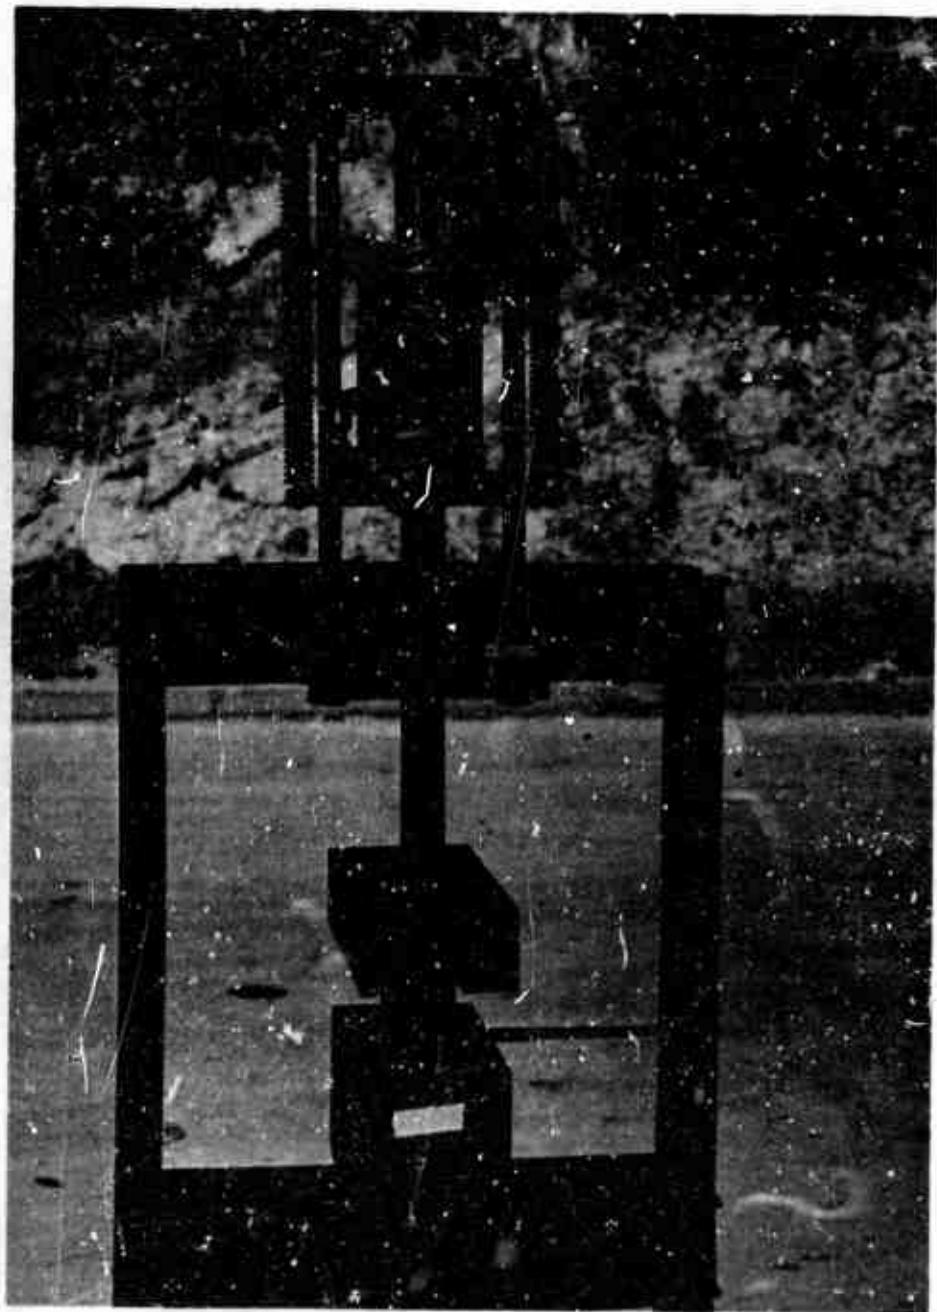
Press Operated Tooling for Explosive Spot Welding.
